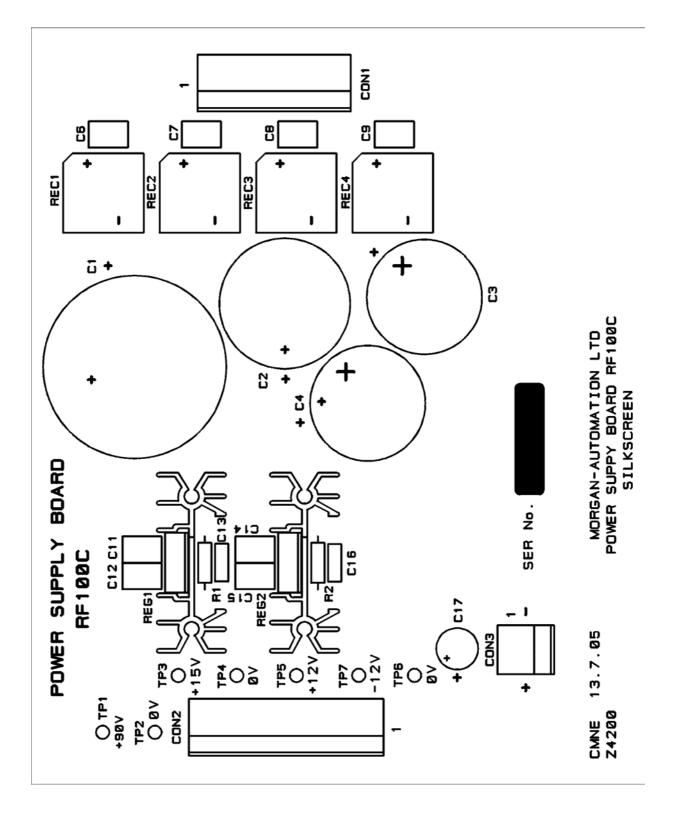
Power Supply Board –RF100 C – Component Layout
